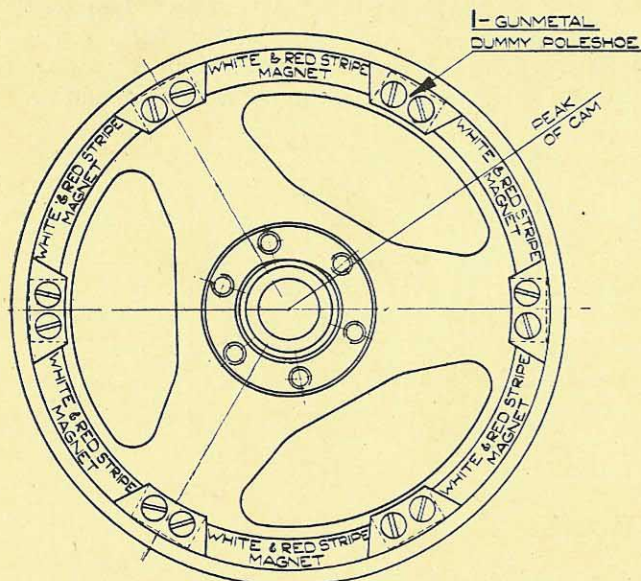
MAGNETO FLYWHEEL ASSEMBLY, MARK 10D AND MARK 6E UNITS.
